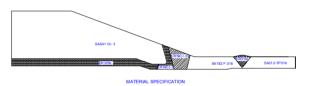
Generic configuration of dissimilar metal weld test specimen(Example)
